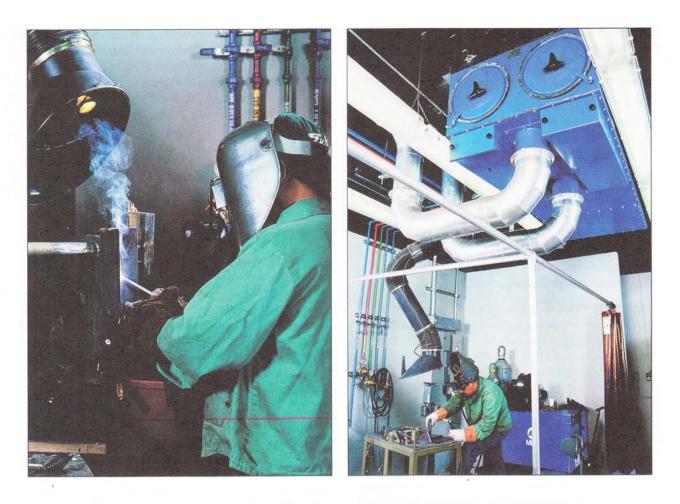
Movable Fume Extractor Positioned Near the Welding Arc
